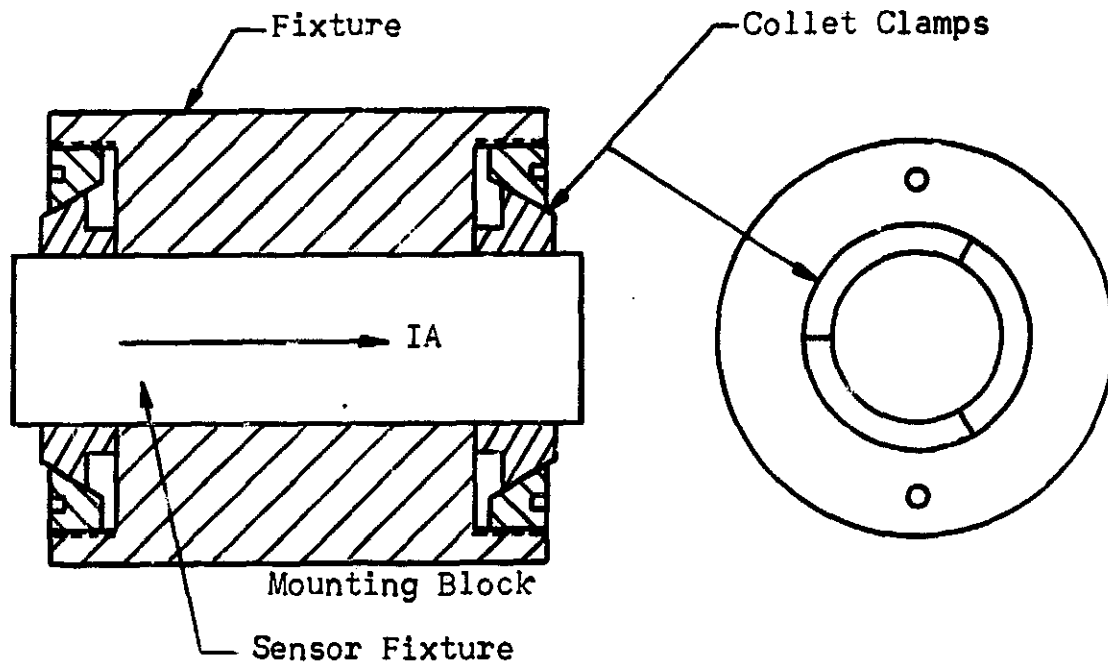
Clamping the Sensor with Collet-Type Clamps
